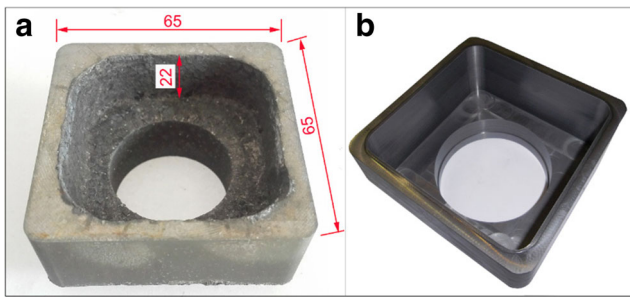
SiC/Al composites workpiece. a Machined with BEAM and b machined with milling
